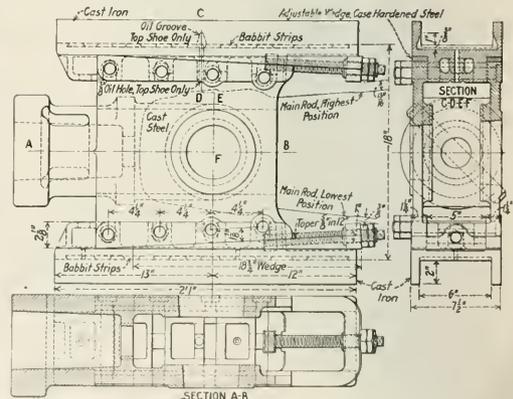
Drawing Showing Alterations in Adjustable Crosshead
